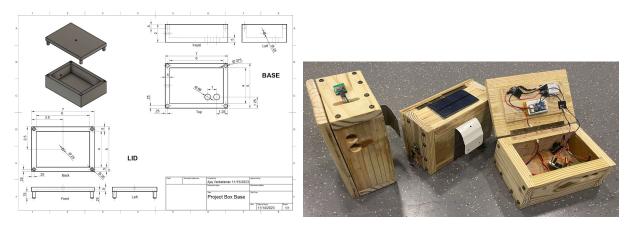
First Draft of Casing Design (left) and Final Casing Design (right)
